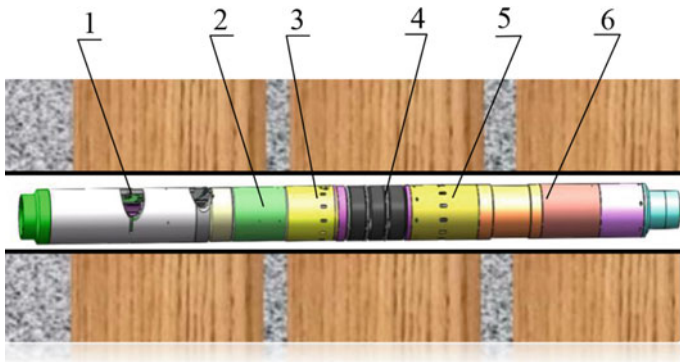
The integrated tool of acid injector and packer. (1, acid injection mechanism 2, unsealing mechanism of the packer 3, pressure guide part 4, seal assembly 5, well cleaning part 6, setting mechanism of the packer)
